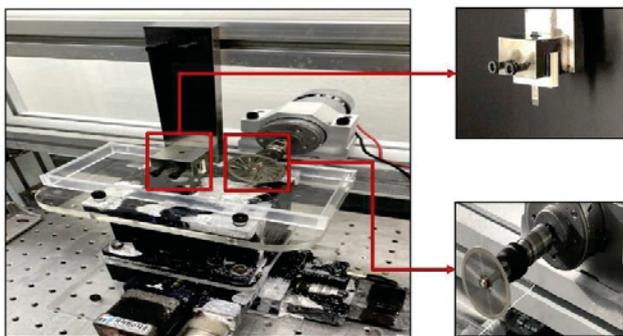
Grinding wheel attached to the ECD system along with the blade tool electrode
